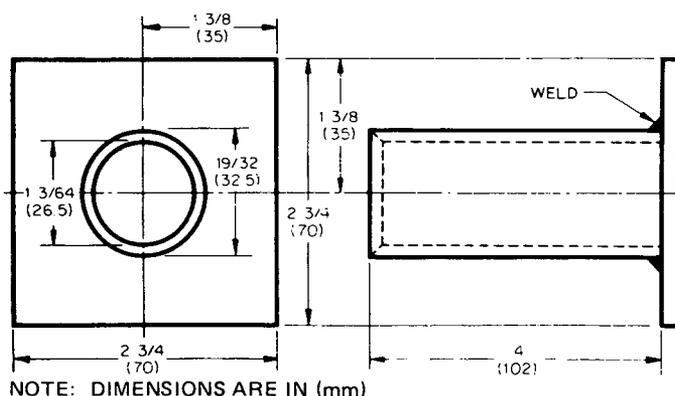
HARDENING BAR PROTECTING FIXTURE TO BE CONSTRUCTED OF HEAT RESISTING ALLOY
